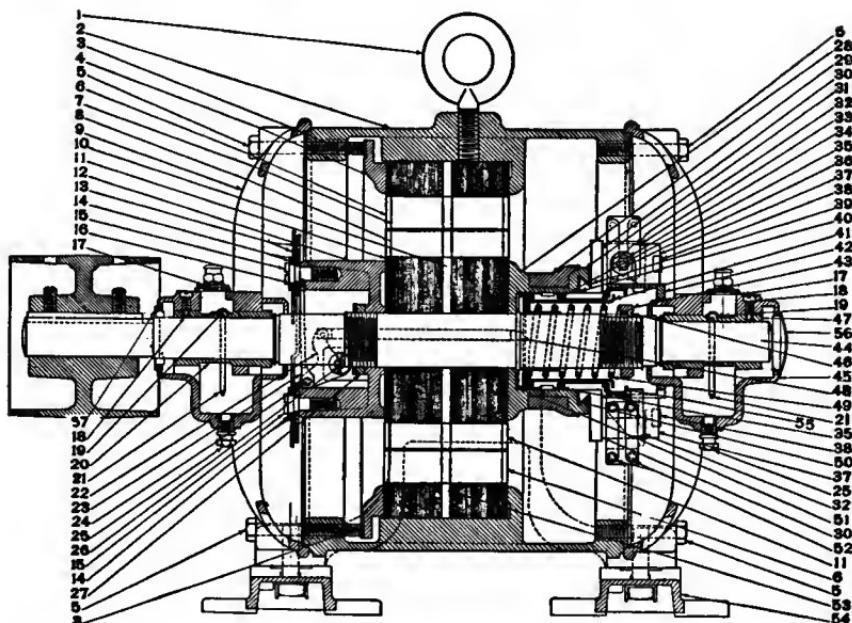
Assembly View of a Century Repulsion-Start Induction-Run Motor
